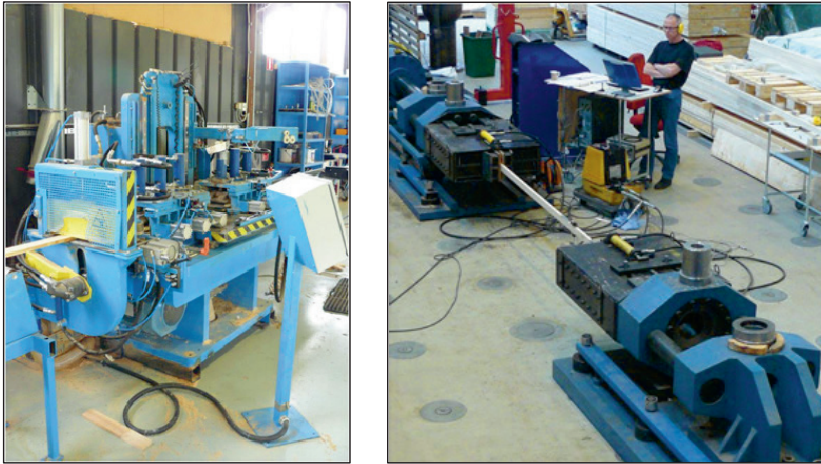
Finger jointing machine Ersson EKS 160 (left), and tension testing machine MFL (right)
